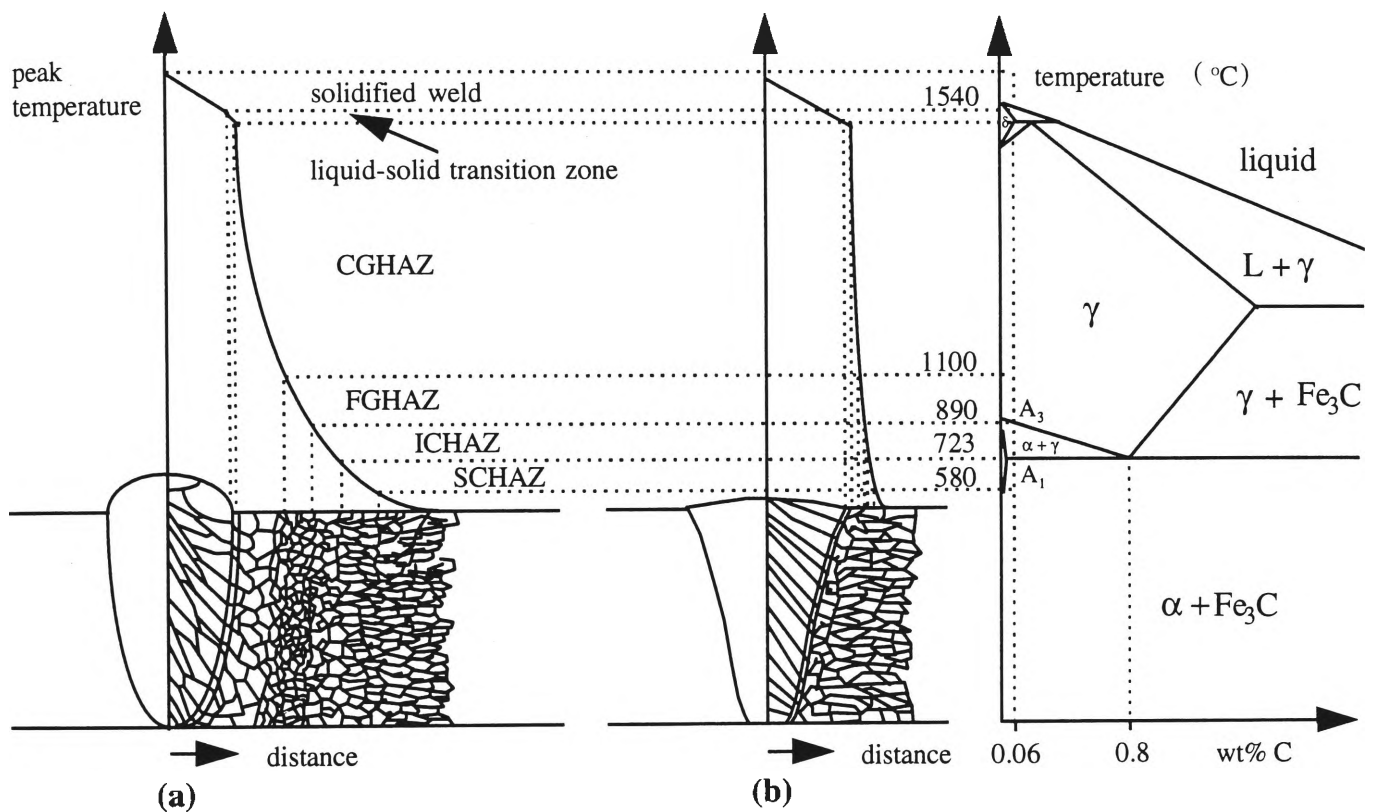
Schematic diagrams showing the room temperature structures of the weld metal and the heat-affected zone in a full-penetration butt joint produced by (a) conventional fusion welding, (b) laser beam welding of a low-carbon steel. The structures are related to the peak temperatures reached in the weld thermal cycle and to the Fe-Fe₃C phase diagram. Typical peak temperature-distance curves are shown for each case, together with the resulting subzones in the cooled weldment.
